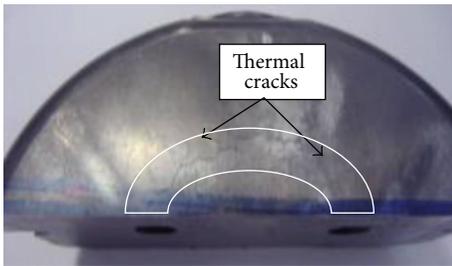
Heat cracks with the internal cooling circuit shape.
